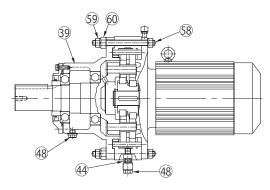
Type CHFM (Horizontal, Gearmotor), Single Reduction (Example: Frame size 6165)
